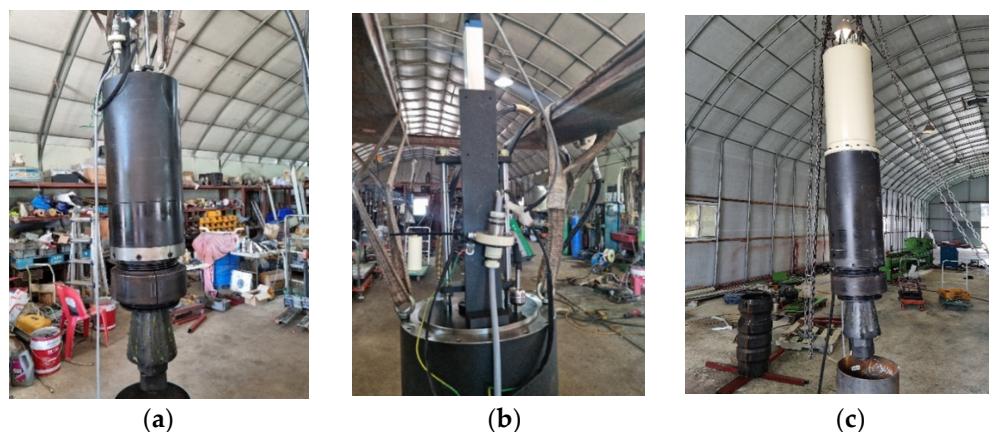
Manufactured full-scale hydraulic expansion equipment: (a) Expander and cylinder; (b) Diameter control system; (c) Steel pipe expansion device.
